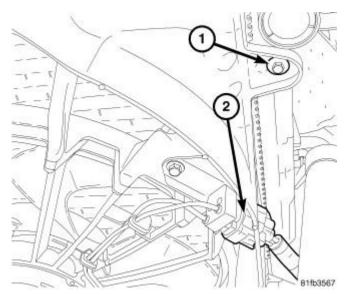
Electrical Fan Connector & Bolt Courtesy of CHRYSLER LLC
